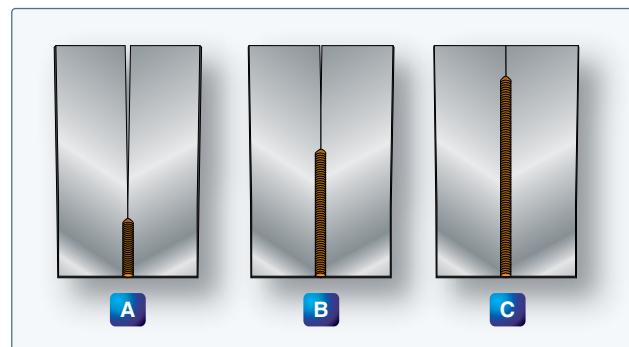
Allowance for a straight butt weld when joining steel sheets.
